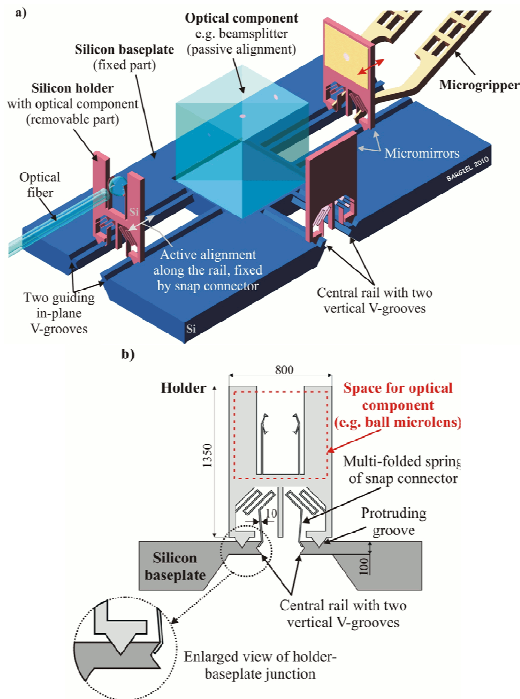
Assembled RFS-MOB: (b) Every holder possesses one optical functionality and is assembled onto a substrate. It's positioning accuracy is ensure thanks to a V-groove system whereas its holding is done by springs. (a) Such emelentary assemblies can be combine onto the substrate to achieve complex optical functionalities.
